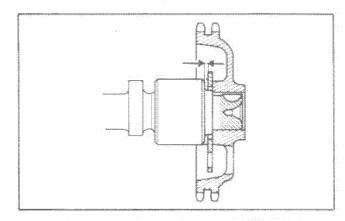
Checking cam flange clearance - 807/841/843 engines
